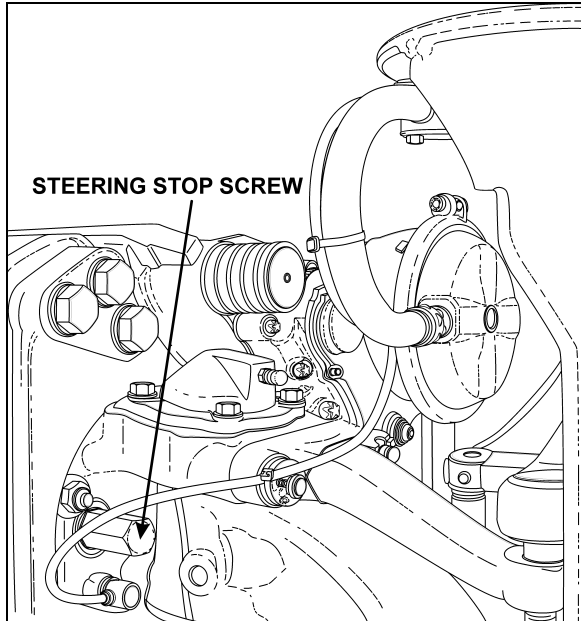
STEERING STOP SCREW ON I-BEAM AXLE
